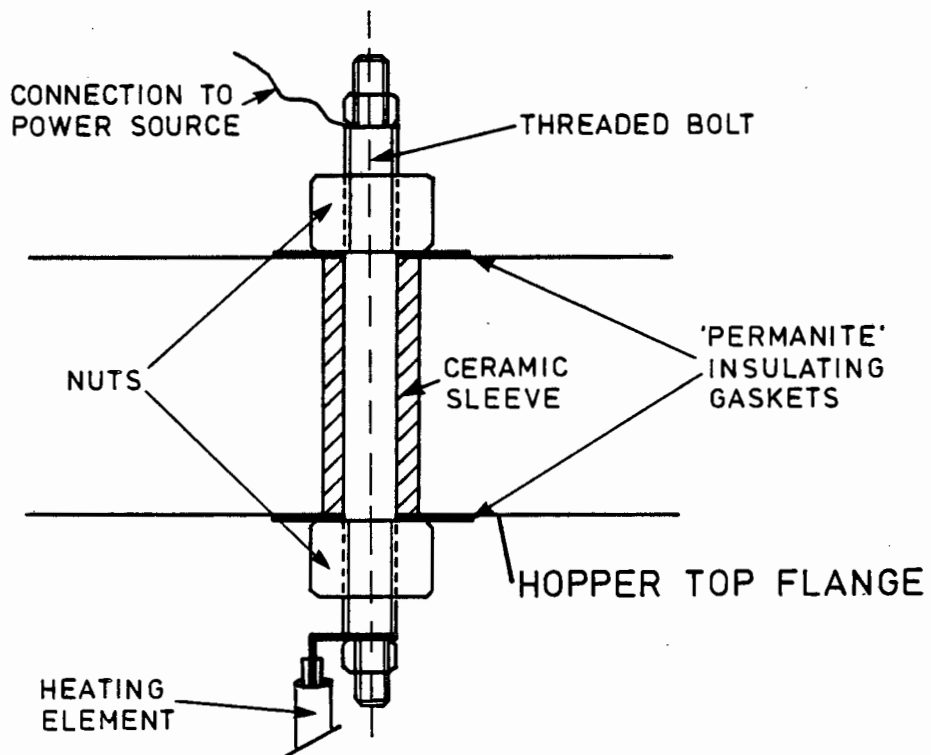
Schematic view of heating bolts connecting heating elements through the hopper top flange.
